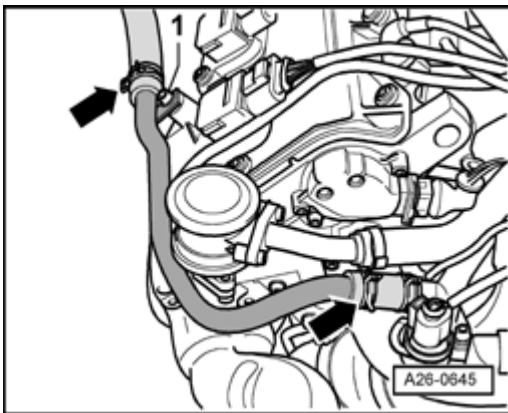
Removing Pipe Of Crankshaft Housing Ventilation
